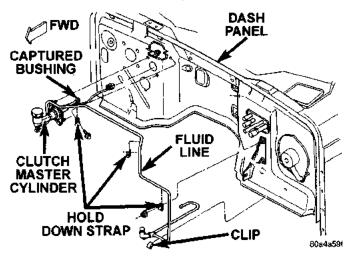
Right Hand Drive Clutch Master Cylinder INSTALLATION
